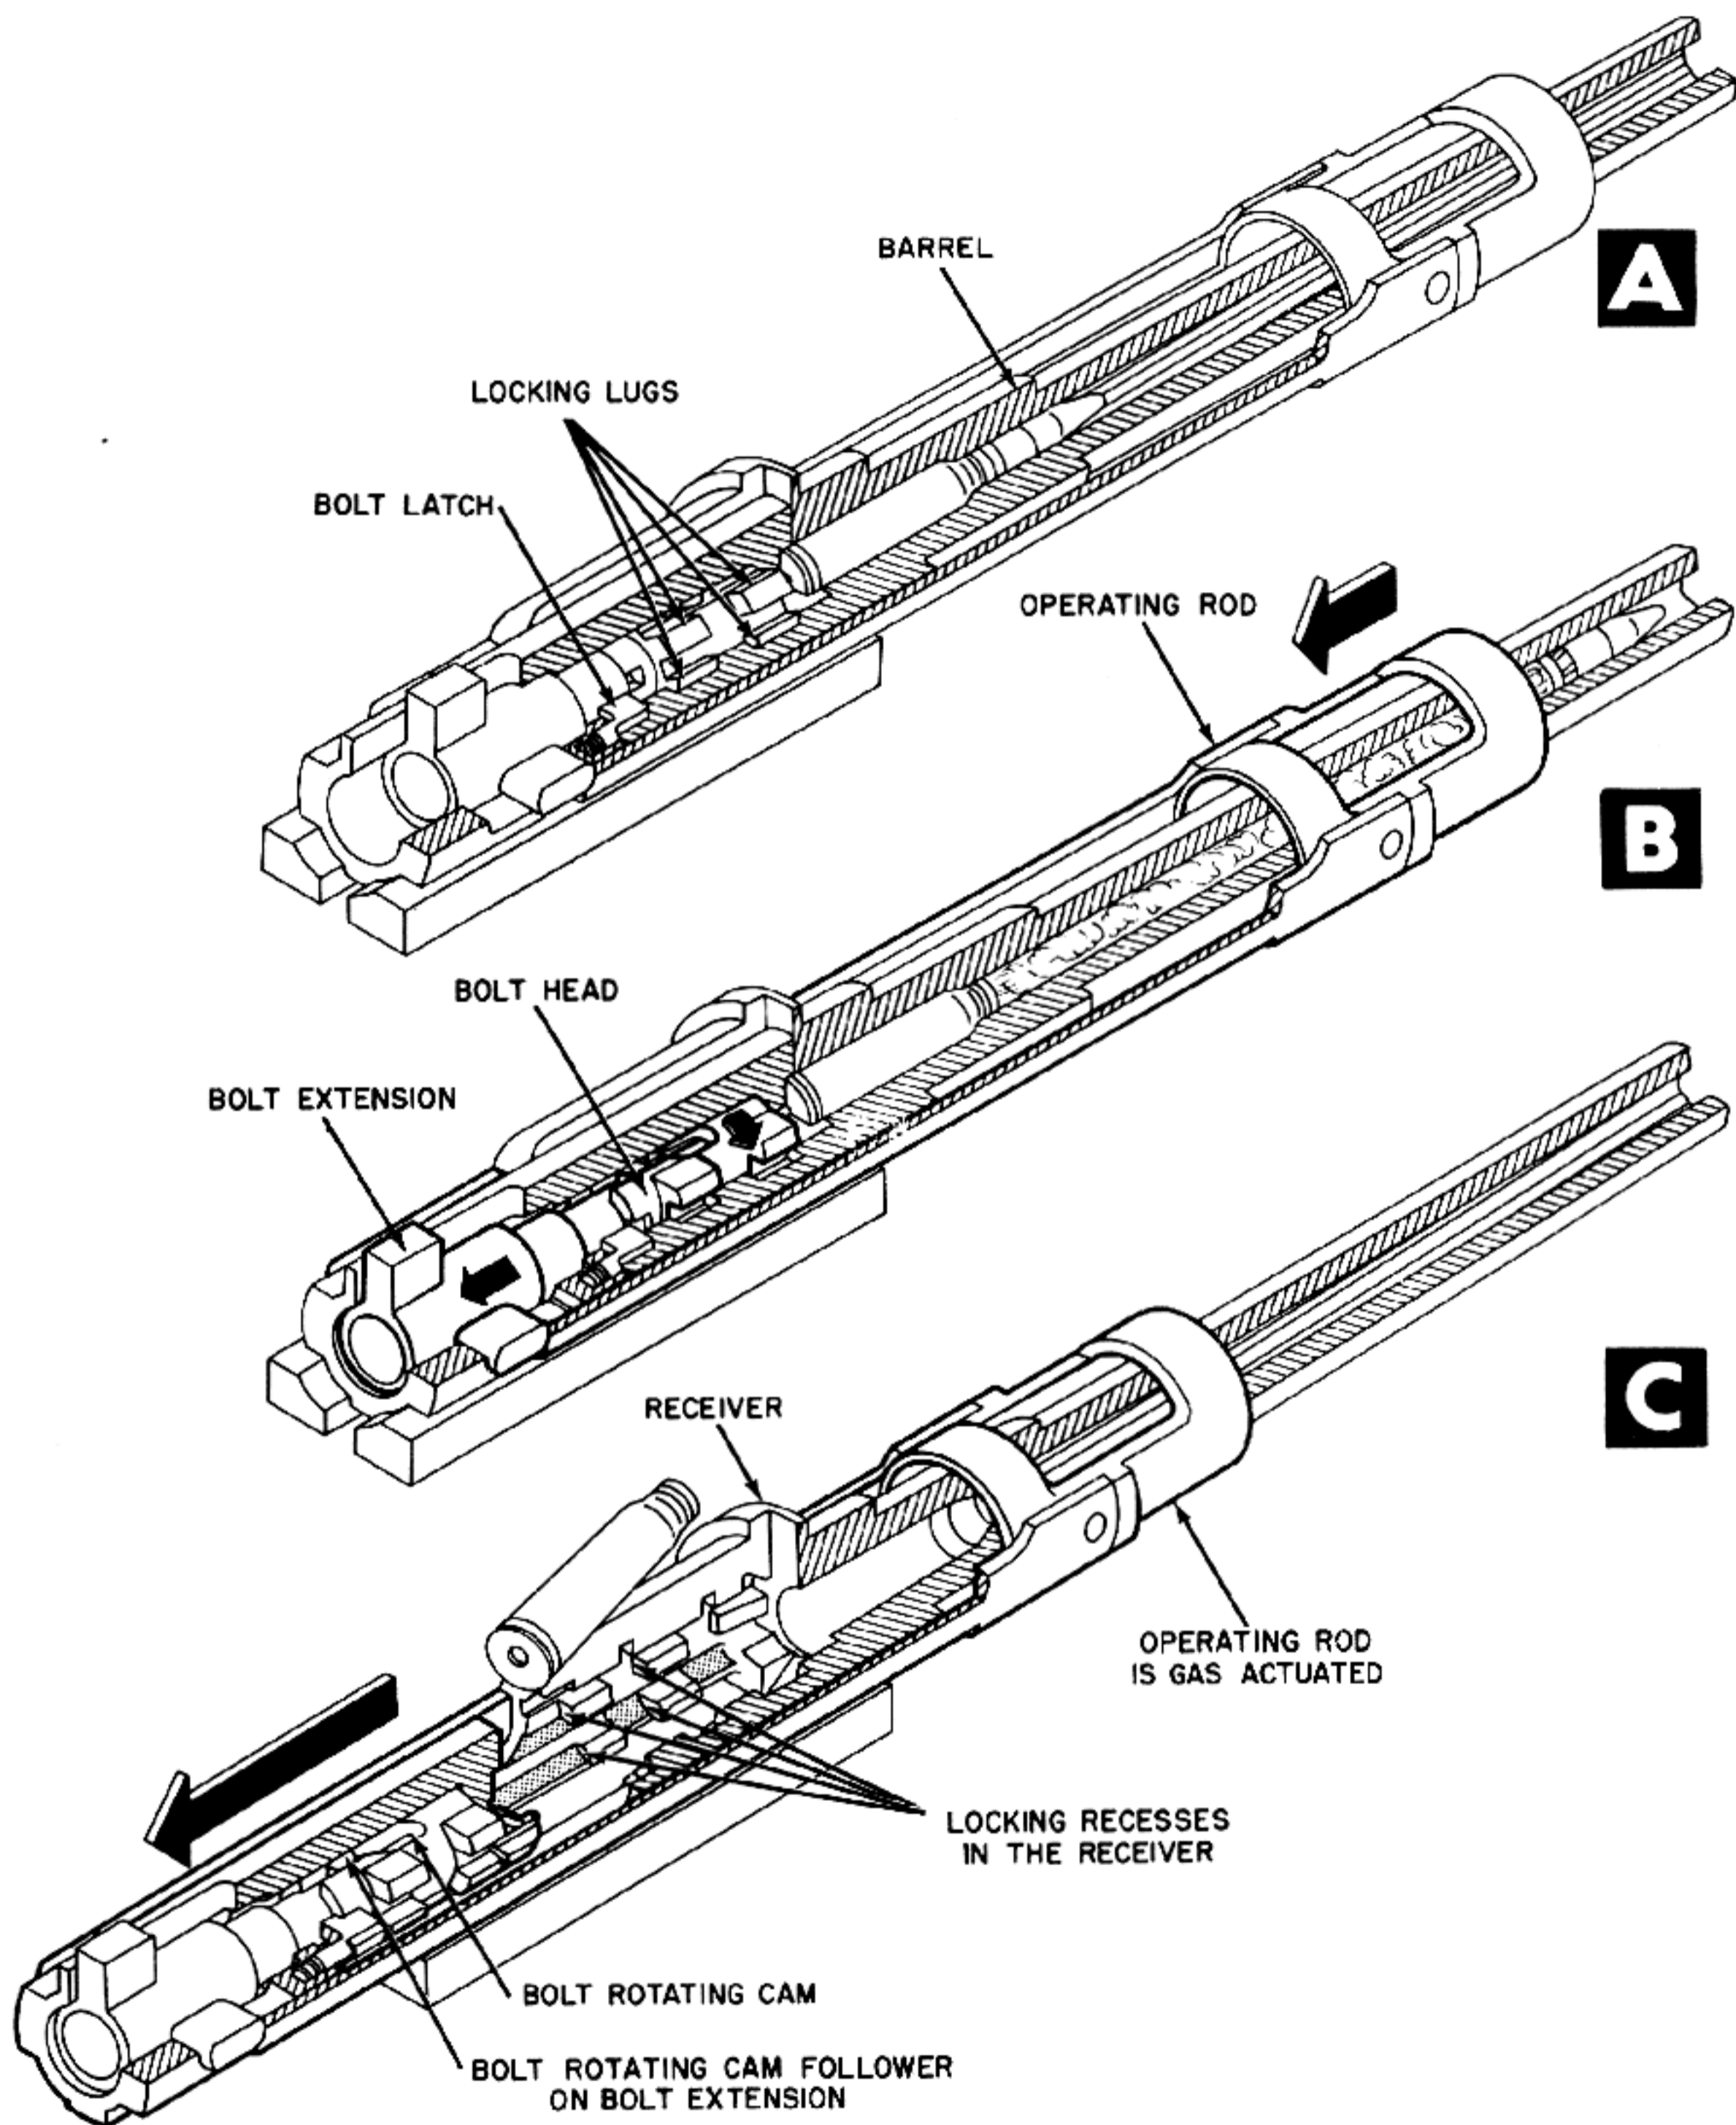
Rearward Motion of Bolt Extension Causes Cam To Unlock Bolt.
